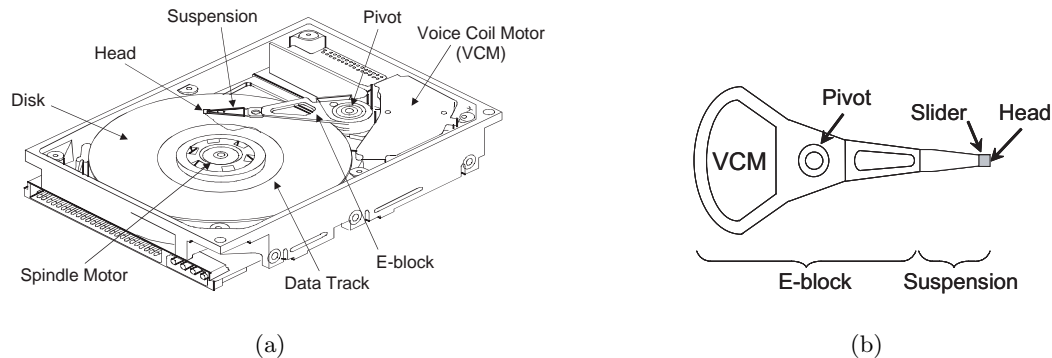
(a) Conventional hard disk drive configuration; (b) Conventional suspension and E-block assembly.
